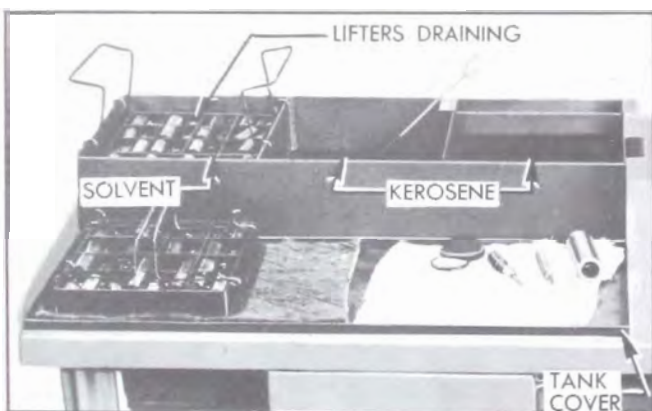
Tank J-5821 Set Up for Cleaning Lifter Parts
